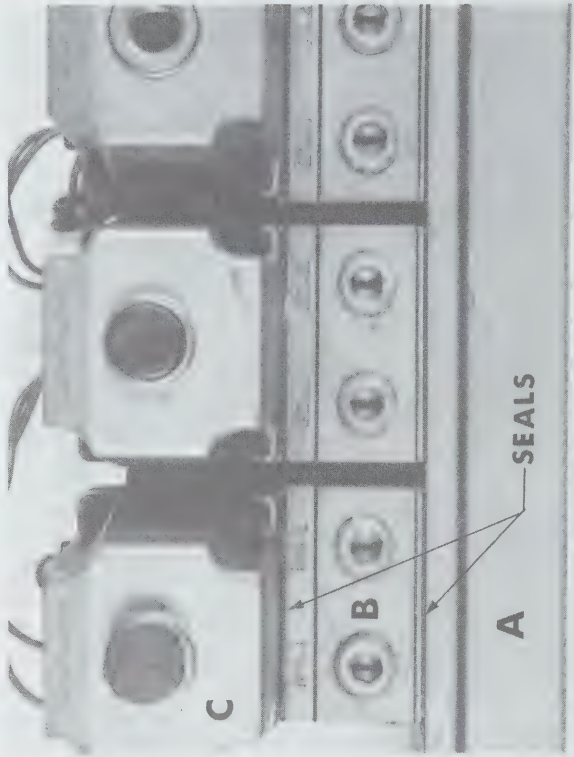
Typical assembly of a solenoid valve bank: manifold A, sub-plate B and valve C. Note the rubber plugs on two of the valves.
